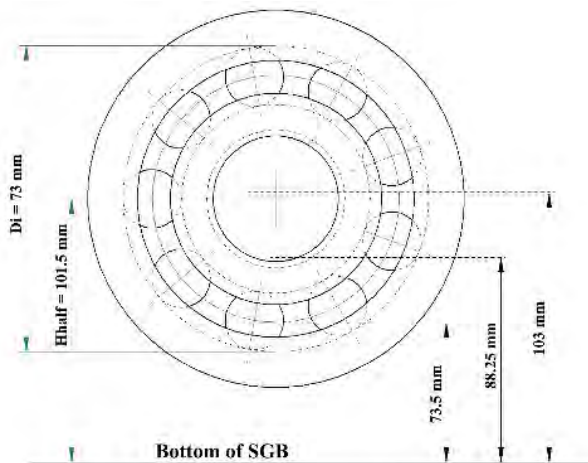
Geometric relation between oil level and bearings. (SGB represents slave gear box)
